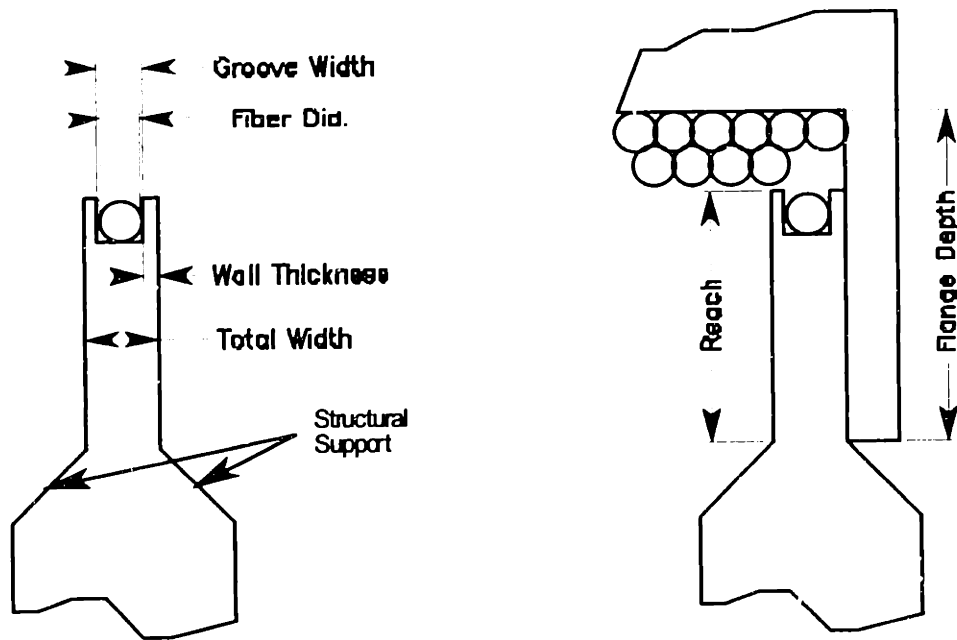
Guide wheel dimensions. The thickness of the guide wheel and its depth of reach are dictated by the fiber diameter and the flange depth.
